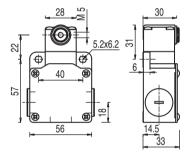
Dimensions of S300-M13C3-M20-CB in mm
